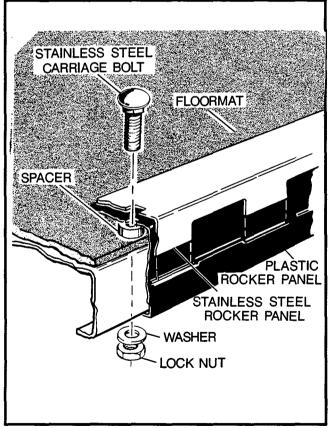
ROCKER PANEL REMOVAL, STAINLESS STEEL AND PLASTIC
